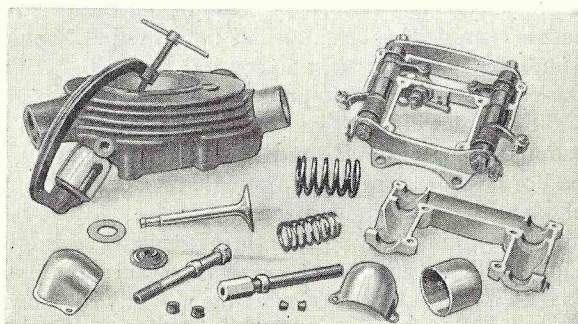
CYLINDER-HEAD AND ROCKER-BOX ASSEMBLY
